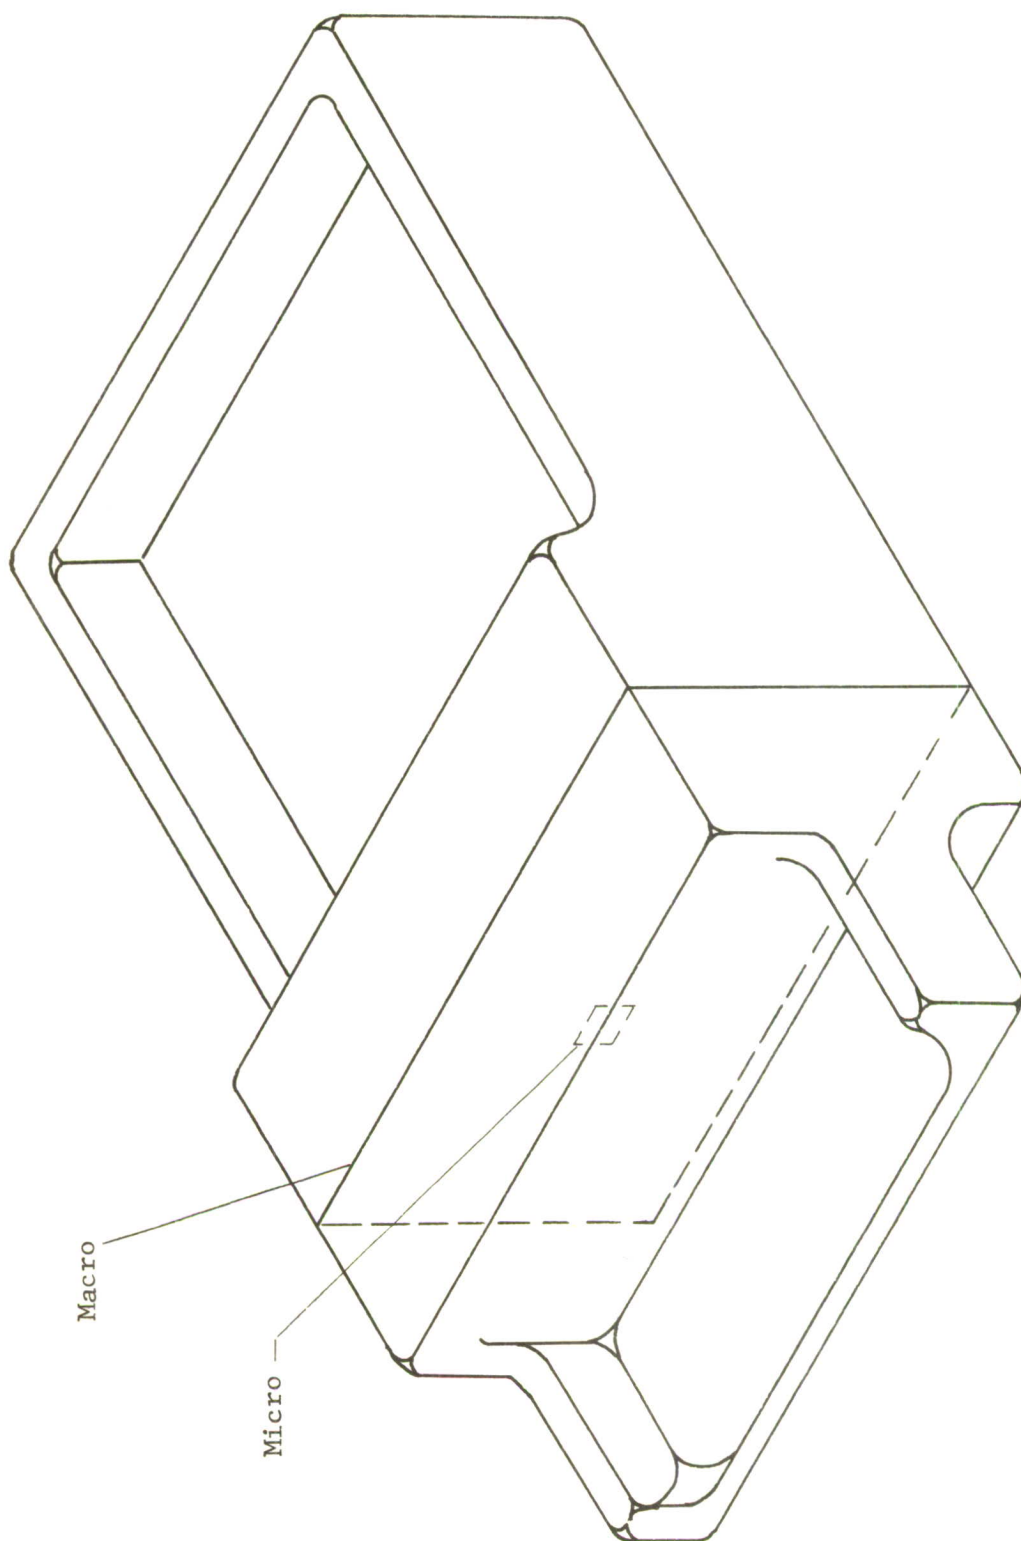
Drawing of Test Forging Showing Macro and Micro Location
